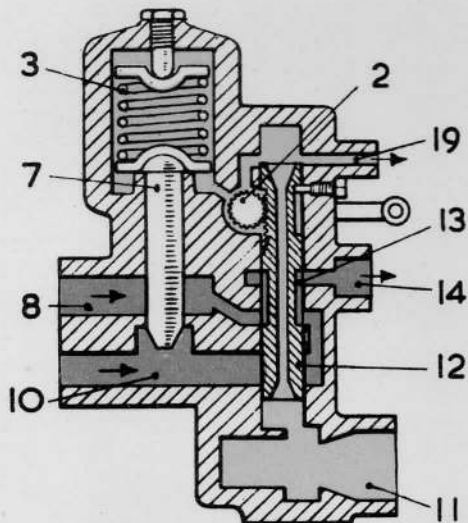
Sectional view of pressurizing valve and shut-off cock
